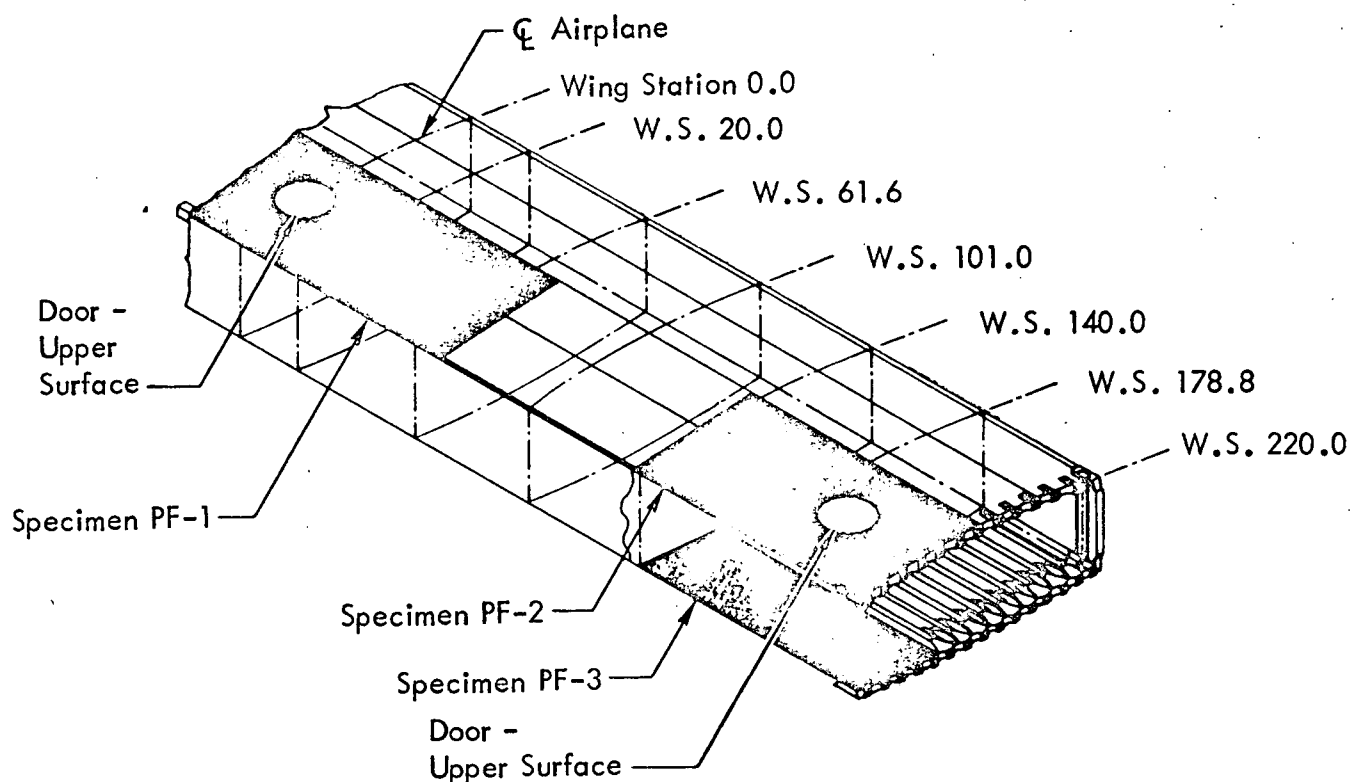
LOCATIONS OF PANEL FATIGUE SPECIMENS
